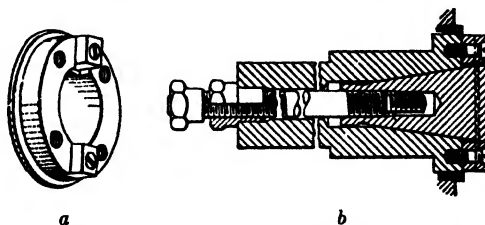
Standardized spindle end. The method of holding arbors and adapters is shown in (*b*). The larger thread on the end of the draw-in bolt is used in most cases, but certain adapters, collets, etc., require the smaller thread.
